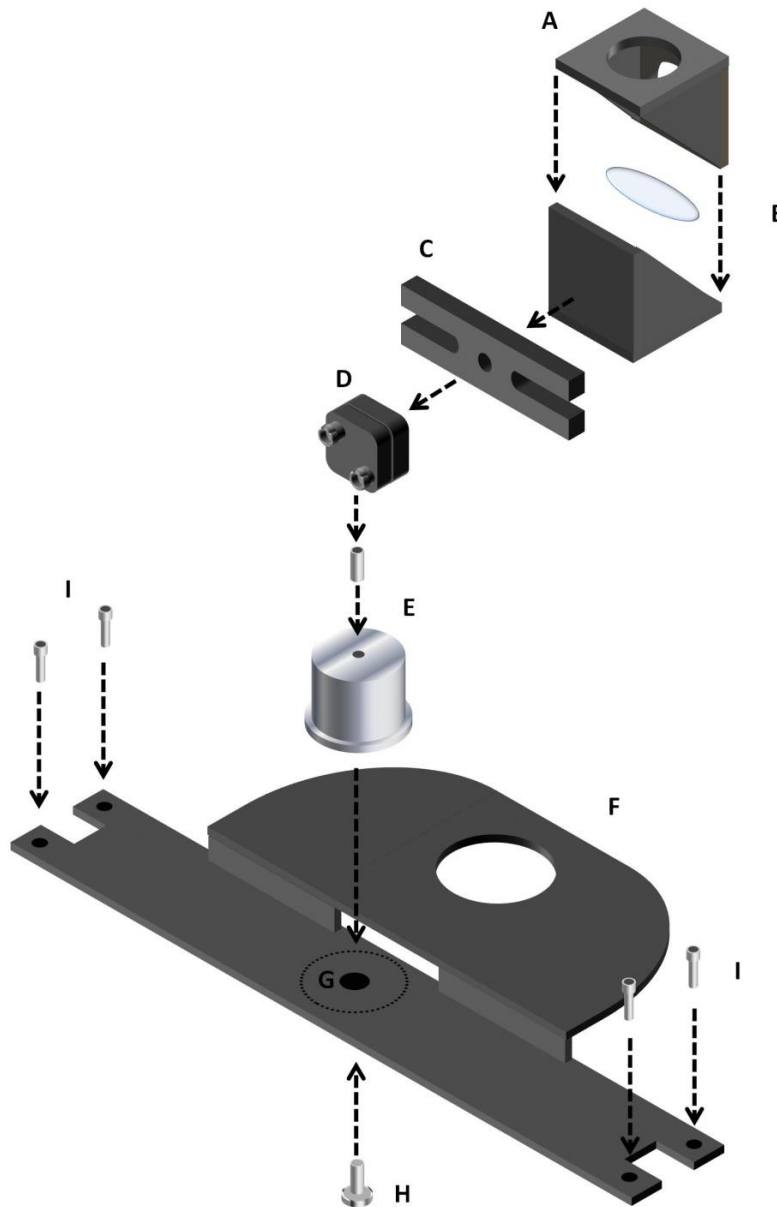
An exploded view of the dichroic mounting adapter. The dichroic mounting adapter is composed of a metal filter cube (A), which contains an IR dichroic mirror (B). The filter cube is attached to a BA1 standard base (C) using glue. The opposite face of the BA1 standard base attaches to a 2-axis compact kinematic mount (D) also using glue. The compact kinematic mount is attached to a Ø1" (1") pedestal pillar post (E) with a #8-32 x 1/4" set screw. The assembly comprising components A through E mounts to a Nikon adapter plate from a 70 mm stage-up kit (F) so that the dichroic mirror sits in the beam path. This is accomplished by drilling a hole (G) and using a #8-32 x 1/4" screw (H) to position the dichroic mirror over the opening in the adapter plate. The entire assembly is affixed to the microscope using screws (I) included in the 70 mm stage-up kit. Figure 7.1 shows the location of the dichroic mounting adapter on the microscope.
